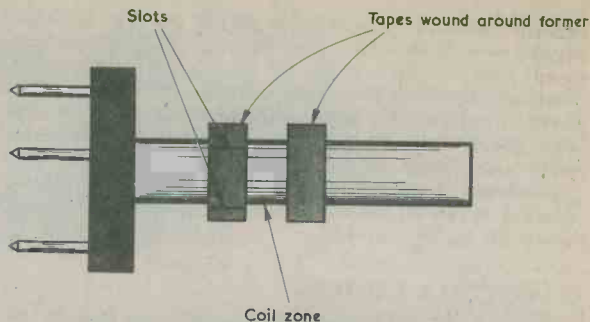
"Bobbin ends" can be built up with tape to contain a multi-layer coil over a short length of former
